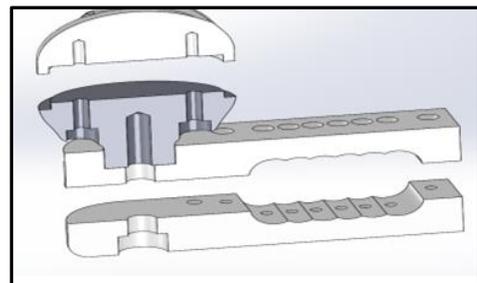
Offset Hand support CAD assembly with designed-in adjustability
